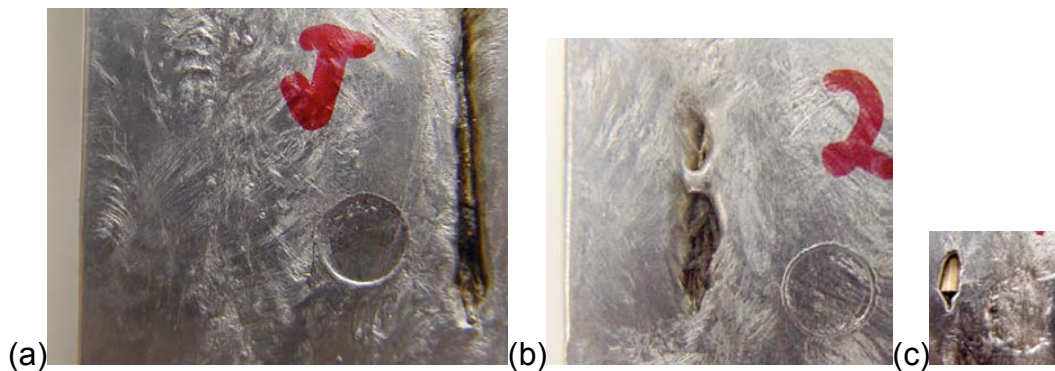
Pictures showing the impression of the sensor surface on the casting and thermocouple placement at casting surface.
